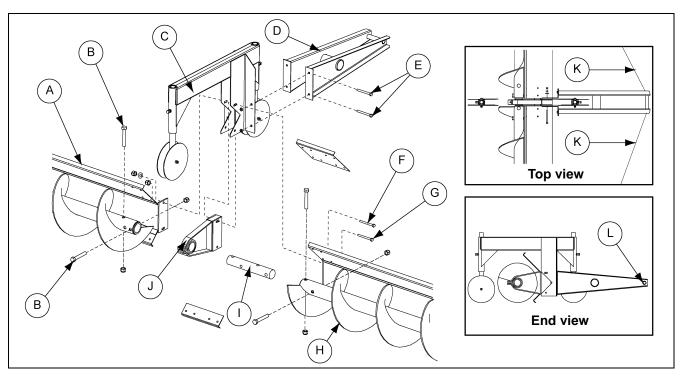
M Sweep Carrier Wheel and Truss Stand Detail
